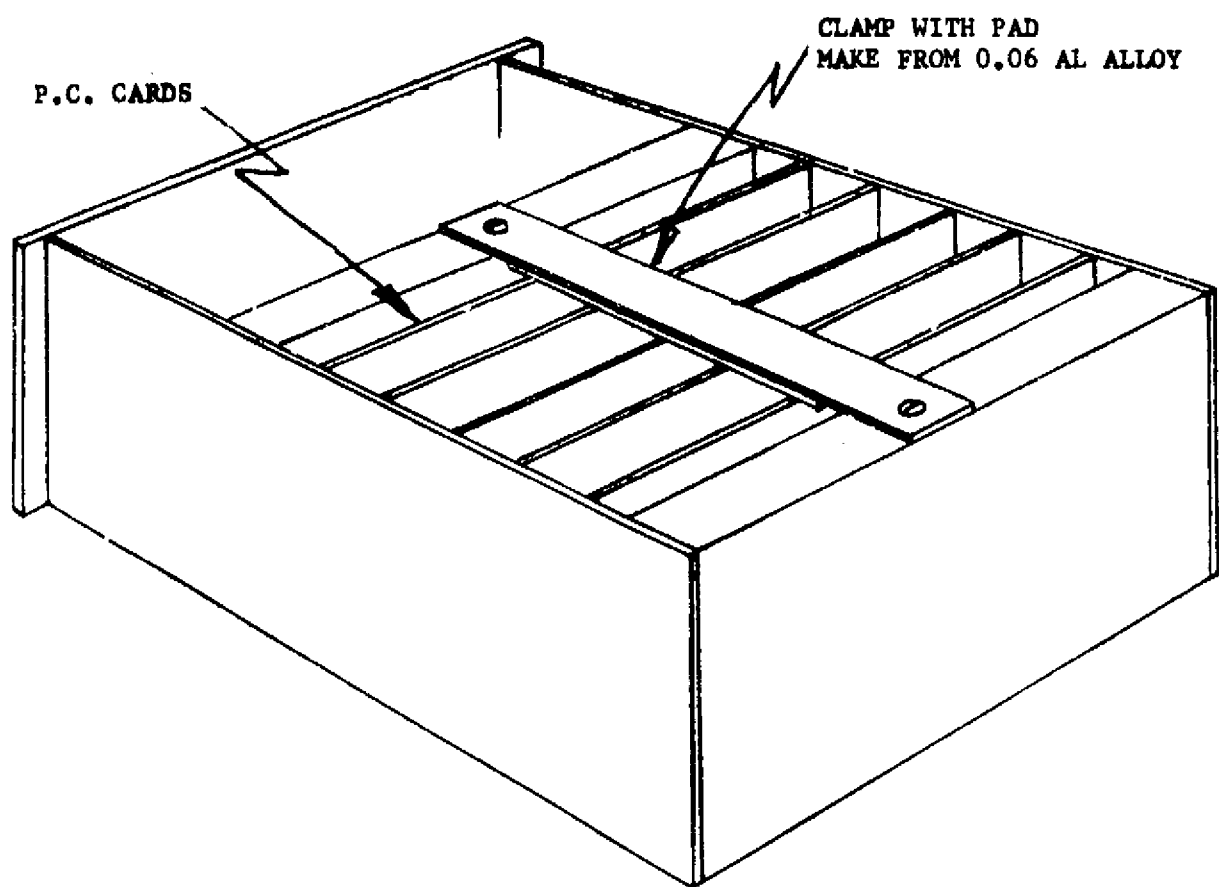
Printed Circuit Board Securing - IF Section
